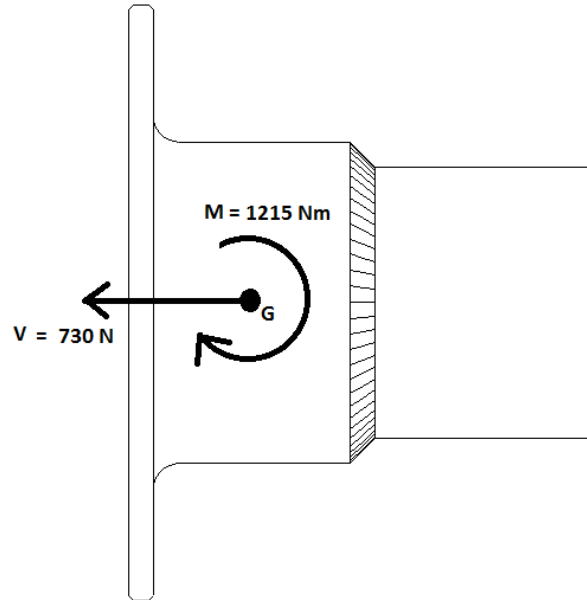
FBD for flange welds on horizontal tube
